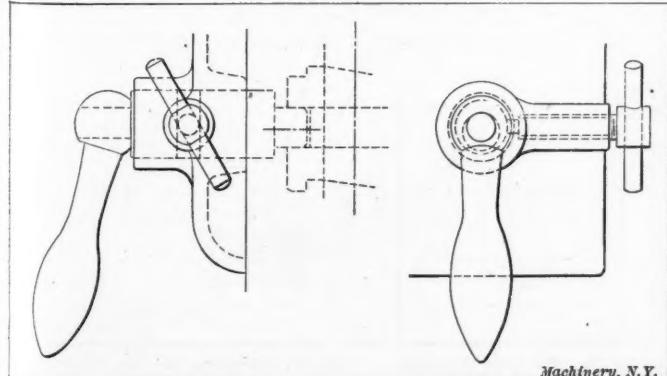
Clamping Screw with End entering Groove for Clamping Stud
